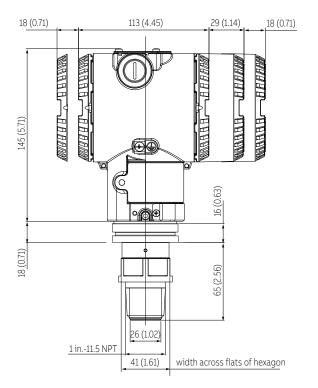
$\,\,$ 266HRH / 266NRH with barrel housing and direct mount seal S26KN pulp and paper 1 in. NPT threaded connections
